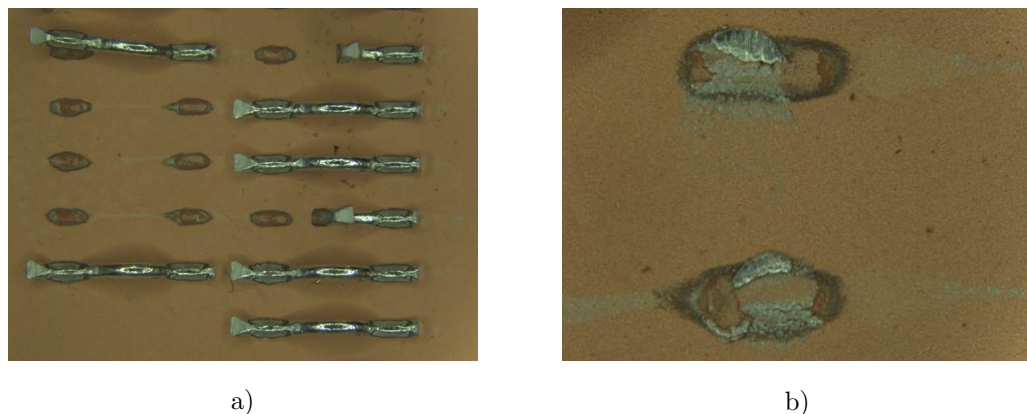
Array of bonded aluminum wires on printed copper paste CP-PLS-291014-R1 on IGBT-A stack (a) and bond feet after shear test on the same bonded wires (b).
